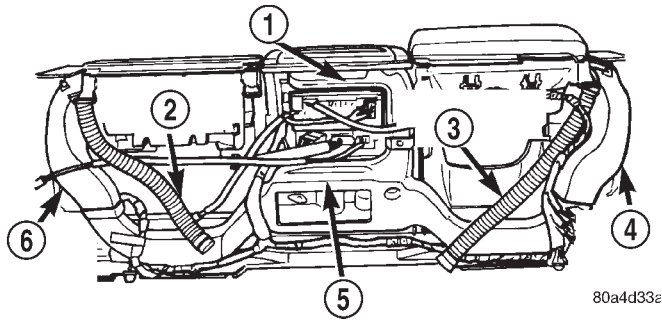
Instrument Panel Ducts and Outlets Remove/Install
